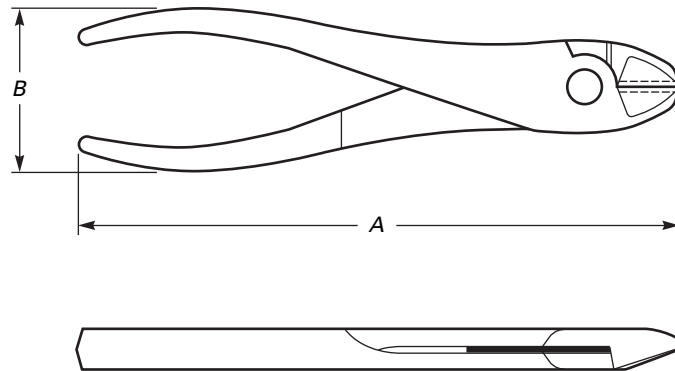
Type I, Alternate Design With Stripping Notches and Skinning Hole
